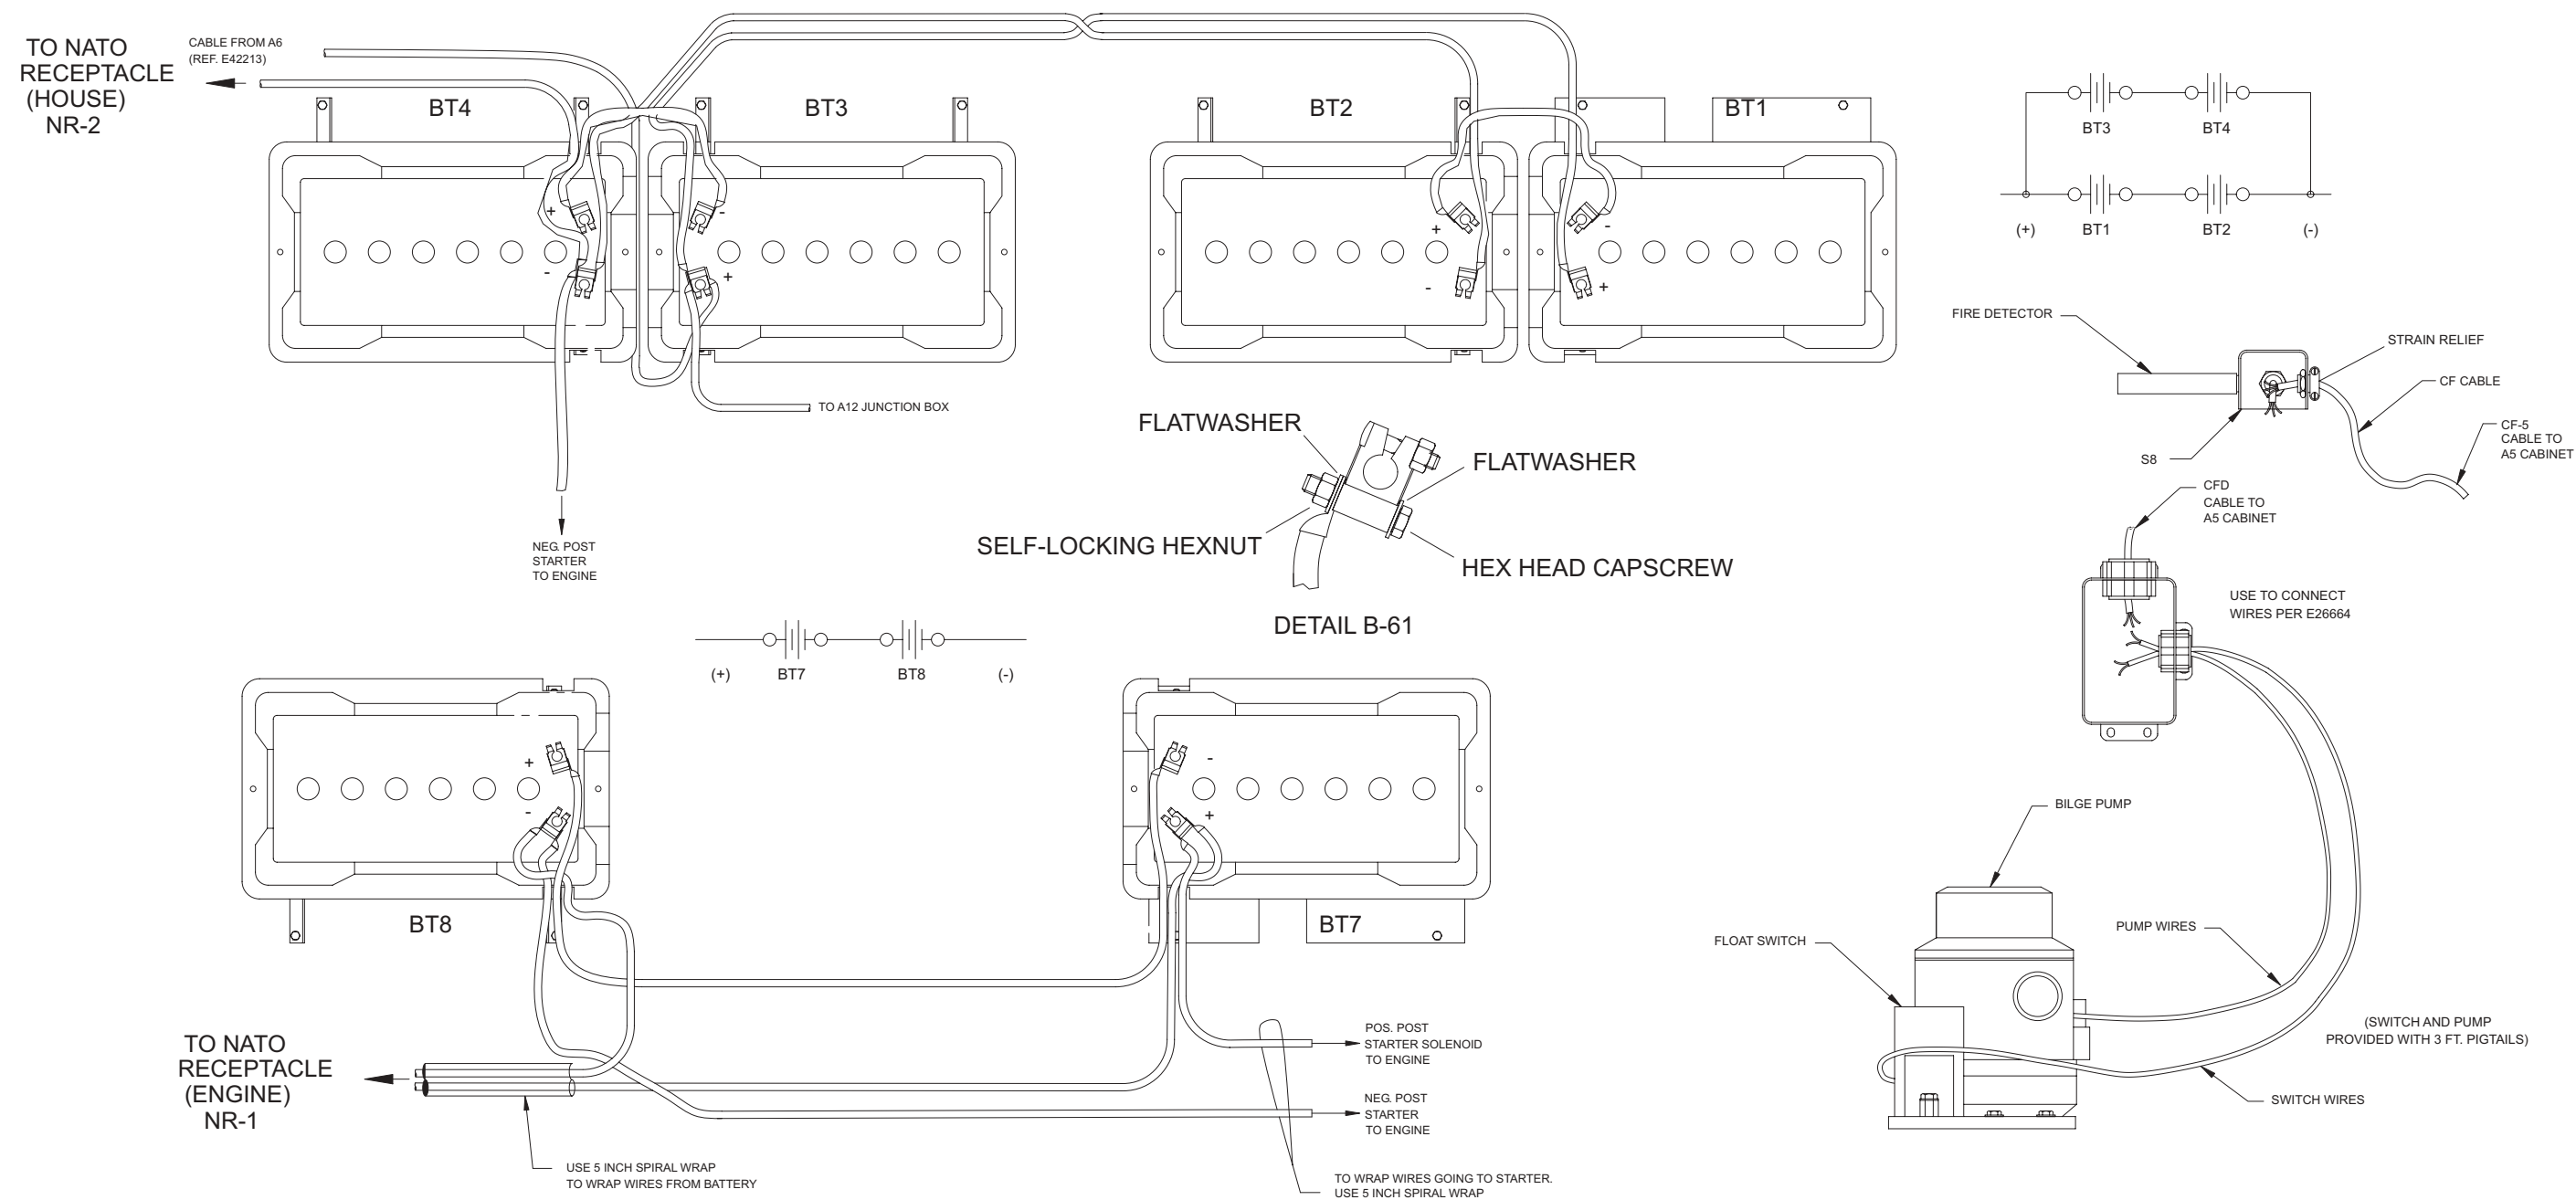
MCS Propulsion Module Electrical Assembly Wiring Diagram (Sheet 3 of 3).
